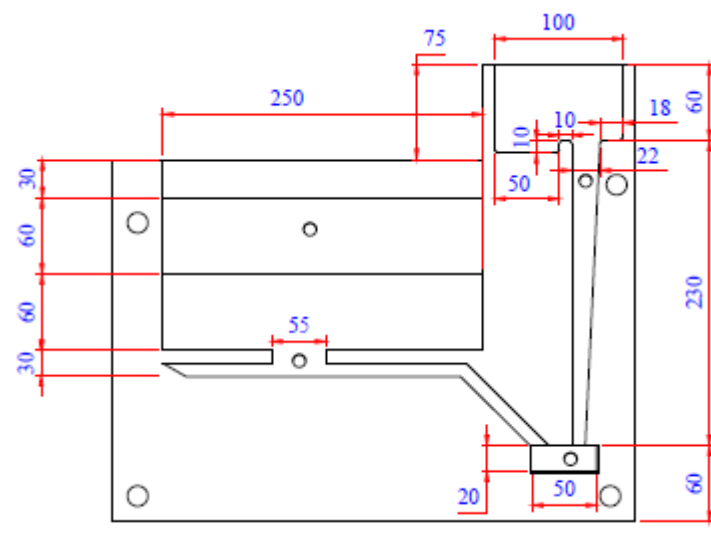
More details of the mould shown in the centre of Figure 3.2.
